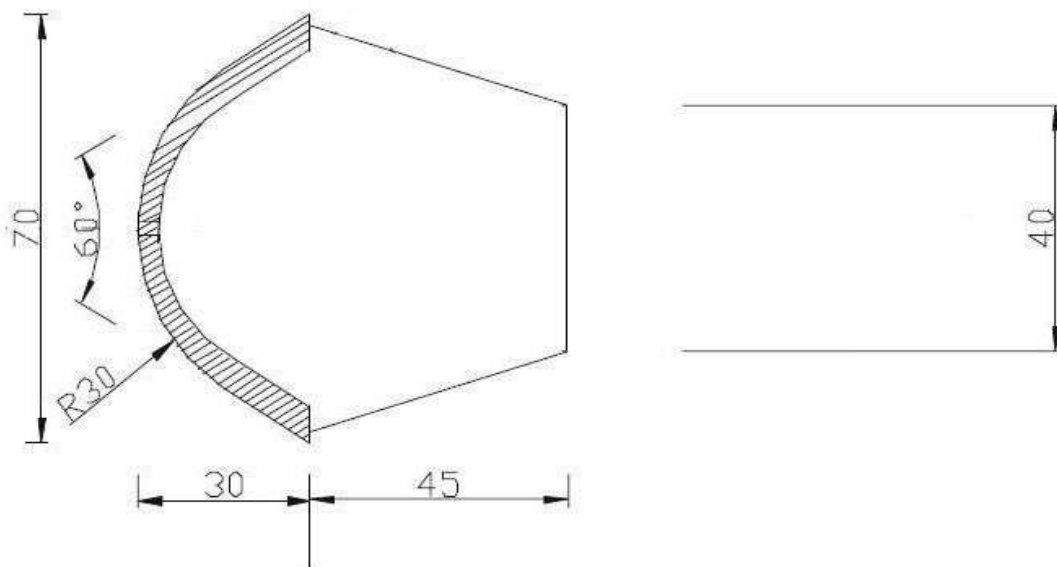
BLUFF BODY DIMENSIONS WITHOUT FUEL INJECTION
